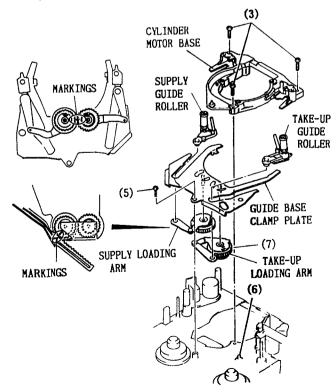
Cylinder Motor Base and Supply/Take-up Loading Arms
